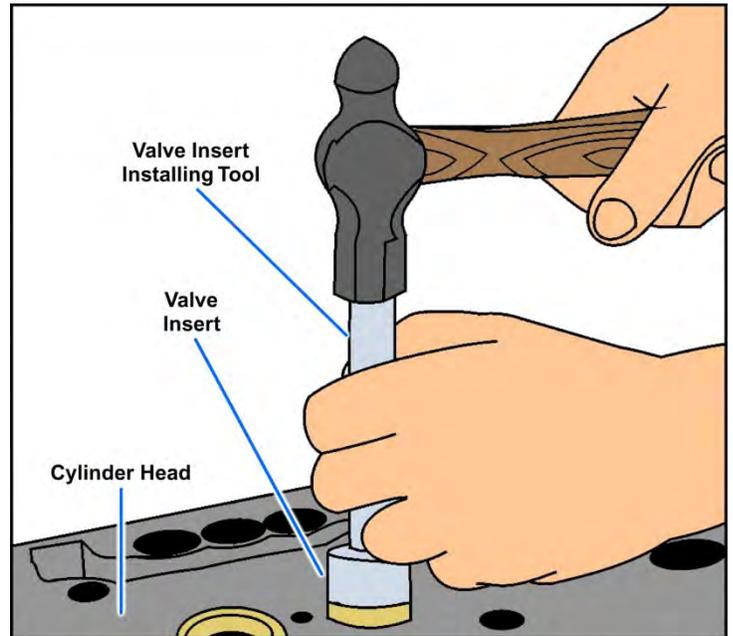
Driving a valve insert into the cylinder head counterbore.
